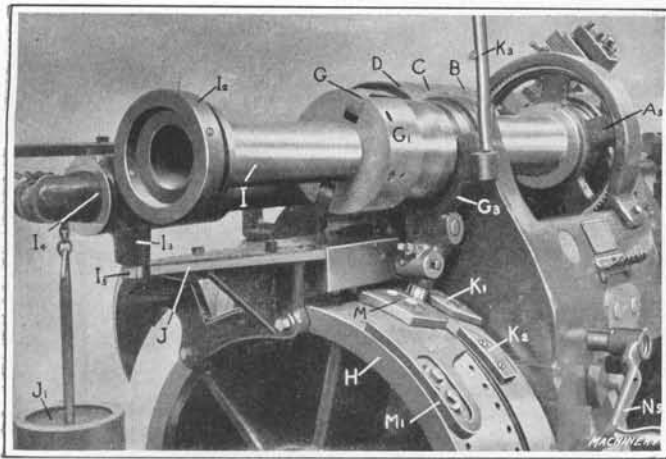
End View of Gridley Single-spindle Automatic Turret Lathe, showing Cams for opening and closing Chuck and advancing Stock Stop, also Cams for operating Stock Pusher
